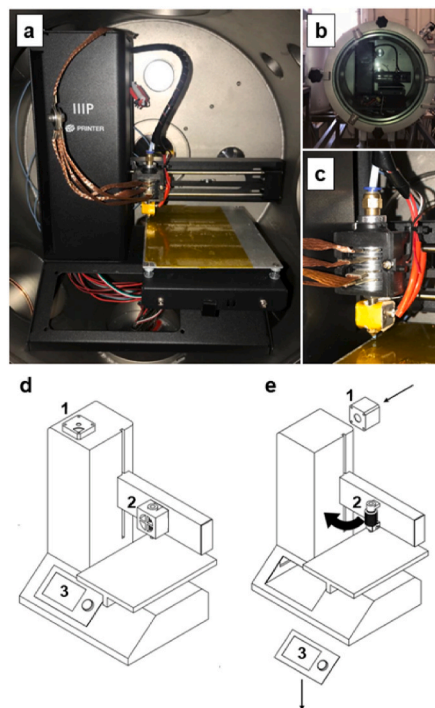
Vacuum 3D printing setup: FDM Printer inside the vacuum chamber (a); overall view of vacuum 3D printing setup (b); detail of the printer hot end: cooling fan has been removed while copper thermal braids are applied instead (c). Printer schematic view before modifications (d). Printer schematic view after modifications (e): repositioning of the extruder motor (1), removing of cooling fan and substitution with copper braids (2) and removal of control interface and control board from the printer body (3).
